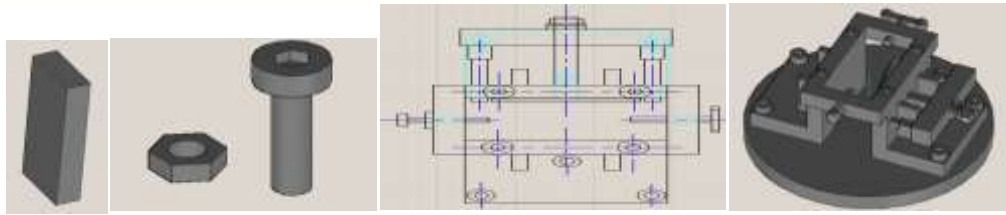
Supporting strip Fig 3.3.6 Nuts and bolts Fig 3.3.7 Fixture - 1 assembly, (2-D and 3-D drawing).
